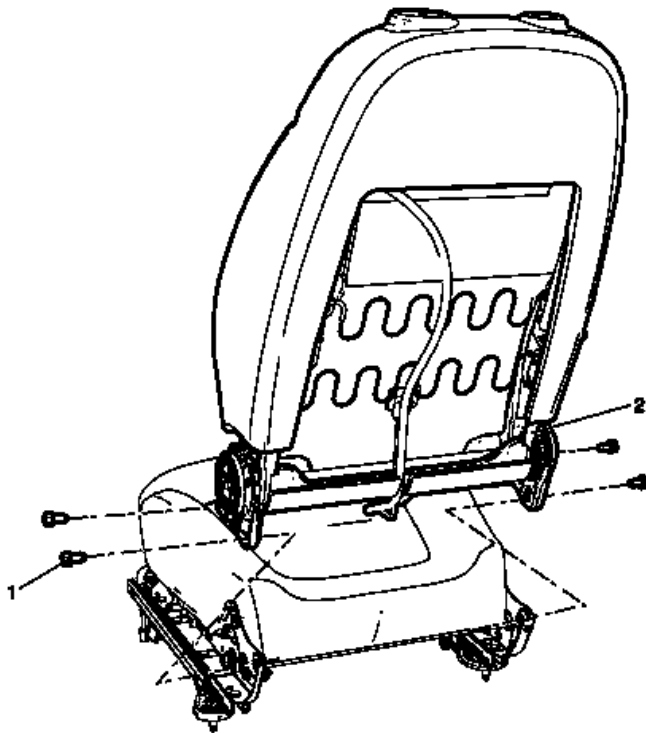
Driver or Passenger Seat Back Cushion Frame
